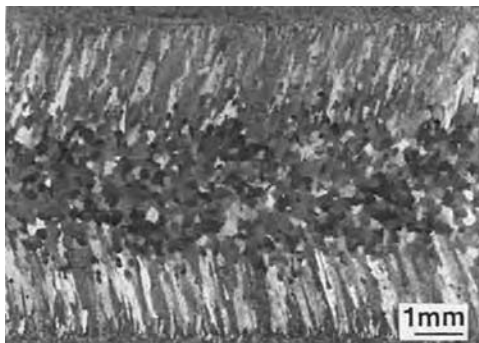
Example of equiaxed zone in the centerline of a weld made with the gas tungsten arc welding process on 6061 aluminum. Source: Ref 2
